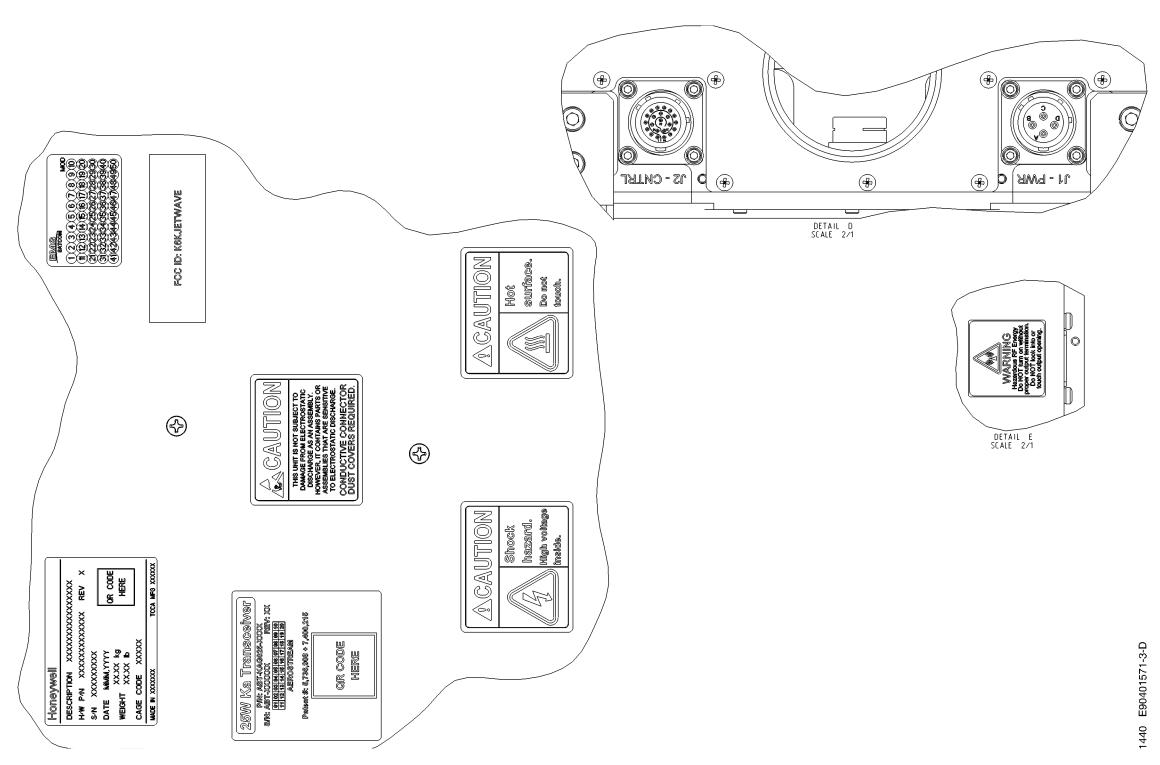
(Sheet 3 of 3) KRFU, Forced Air Cooled, Outline and Installation Drawing (90401571, REV D)
